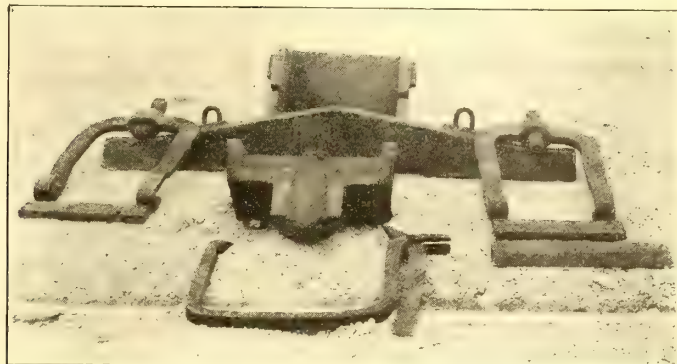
MOLDS AND CLAMPS, MILWAUKEE
